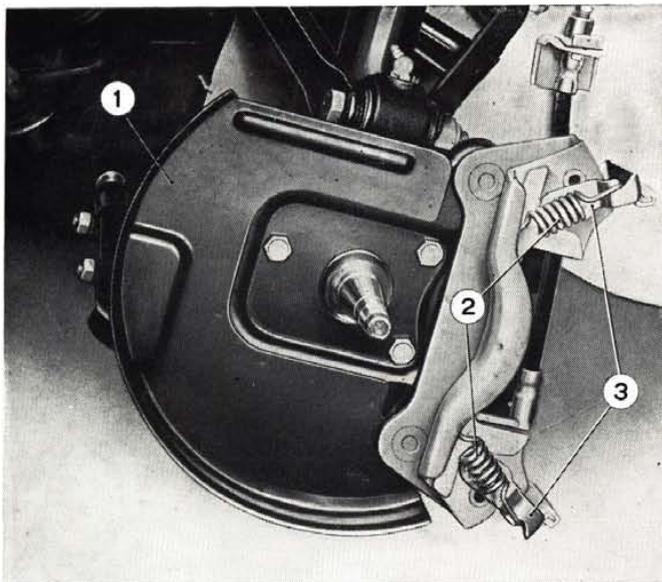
Detail showing caliper mounting bracket and disc splash shield.
